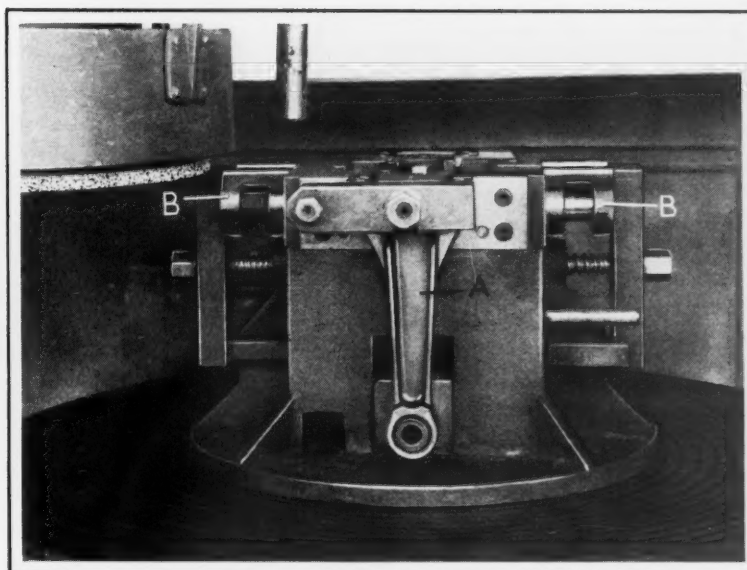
Surface-grinding the Joint Surfaces of Master Rods and their Caps
